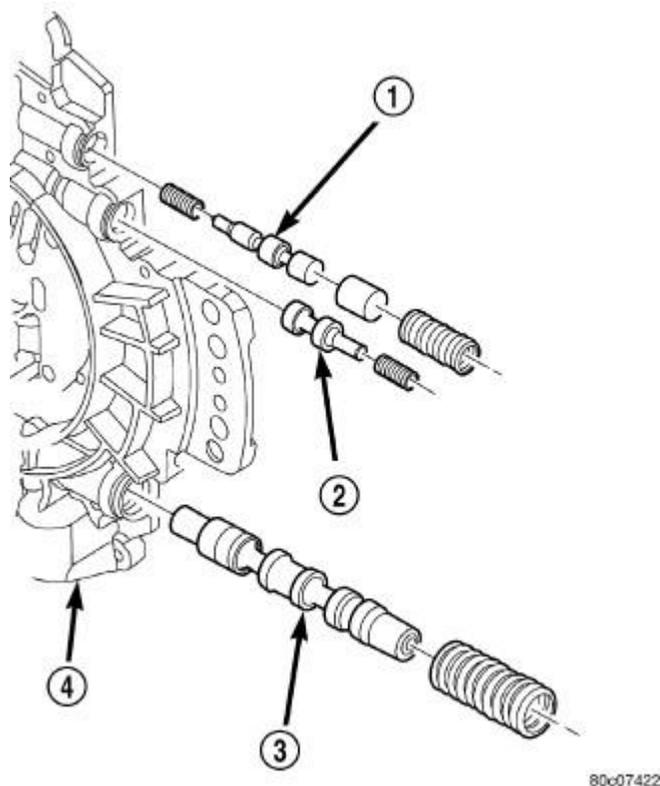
T/C Regulator Valve, T/C Limit Valve & Regulator Valve
